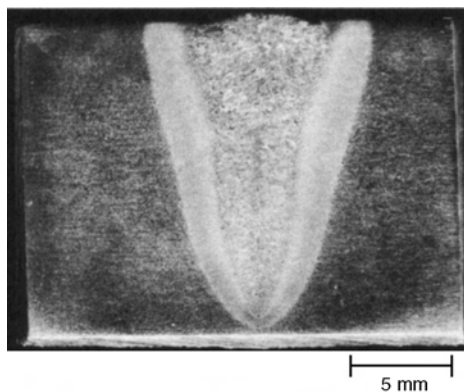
25Cr-1Mo steel plate, single-pass electron beam weld. Macrostructure shows high depth-to-width ratio of the fusion zone, which is typical of high-energy-density welding processes. Source: Ref 1.3
